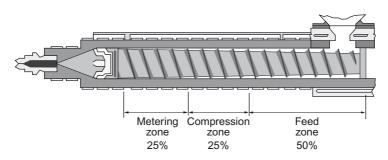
Horizontal in-line injection molding machine showing the hopper, feed-, compression-, and metering-zones
